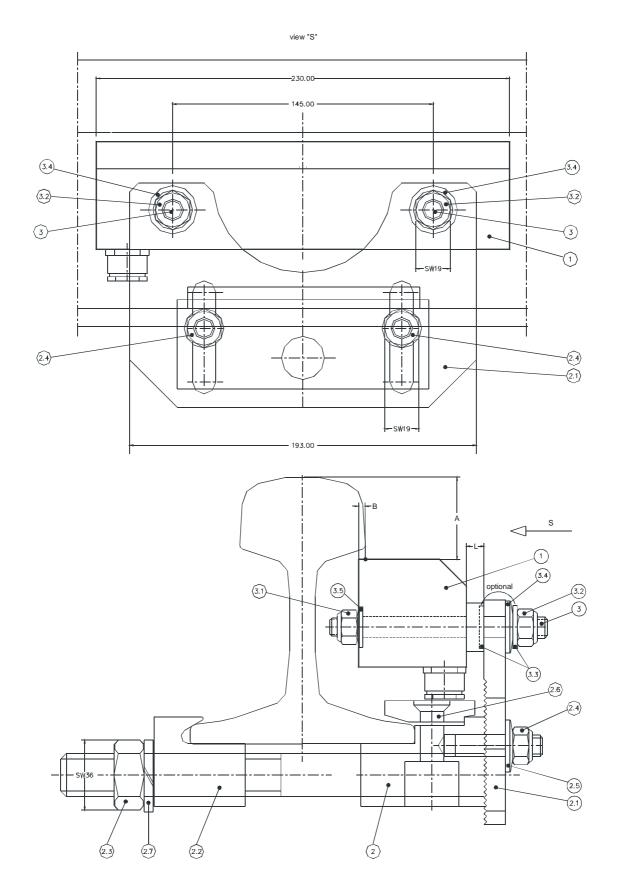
Rail claw mounting of a wheel sensor type RSR180
